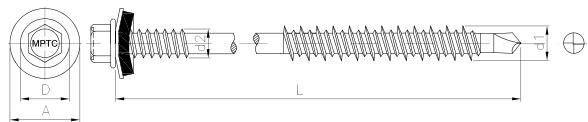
Fastening of steel sheets to timber supporting structures.
